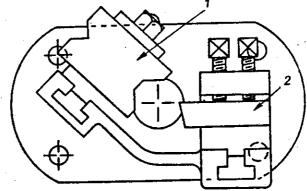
V-steady box tool holder 1. V-steady, 2. Tool.
